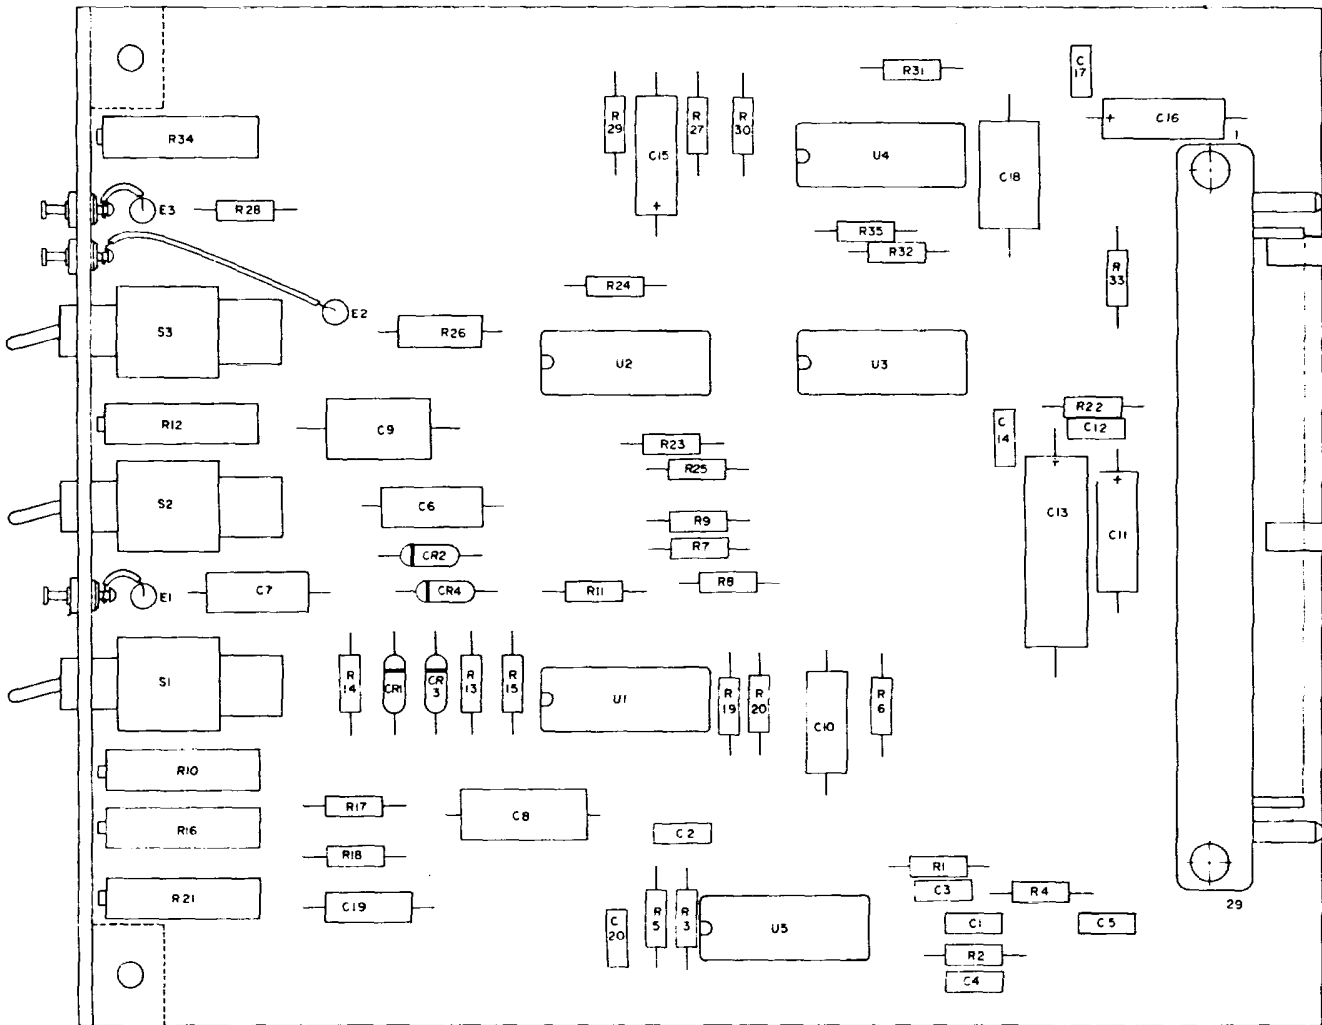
Ident OSC/MOD Mixer Circuit Card Assembly, 1A4A2 Parts Location Diagram
